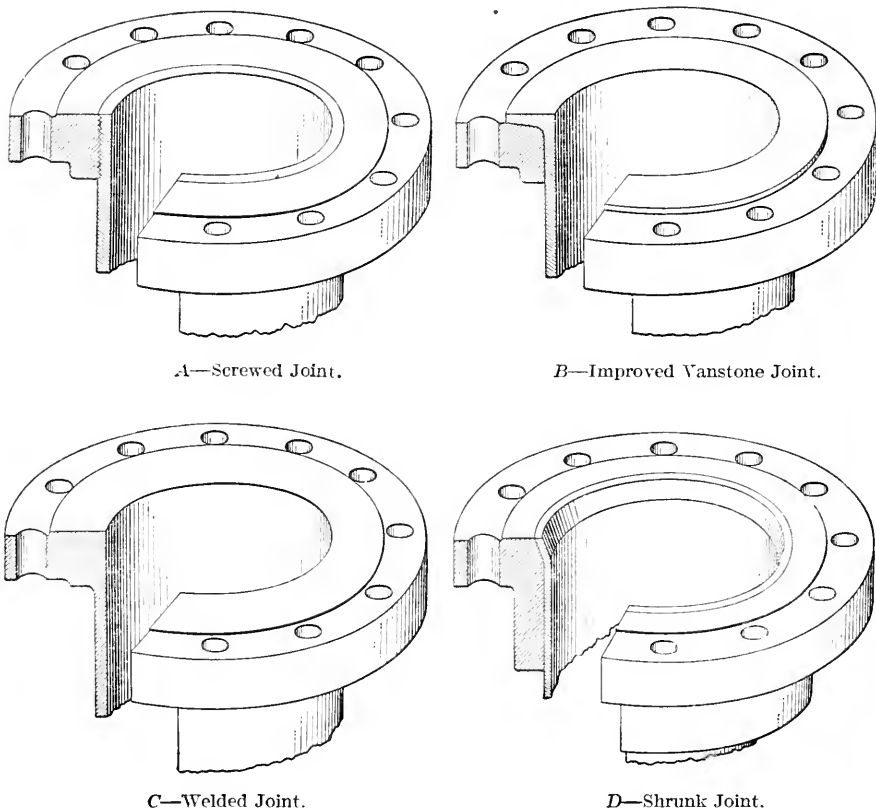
METHODS OF CONNECTING FLANGES TO WROUGHT PIPE.
